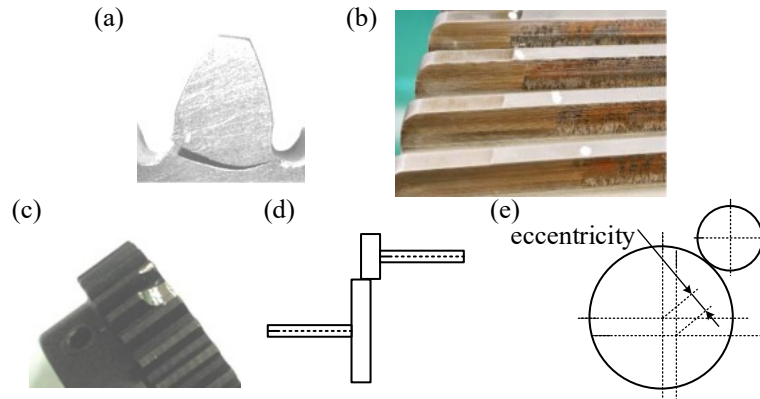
Examples of fault modes (a) tooth crack (b) tooth wear [13], (c) tooth tip chipping, (d) misalignment, (e) eccentricity. The eccentricity is defined as the distance between the theoretical rotating center and real center.
